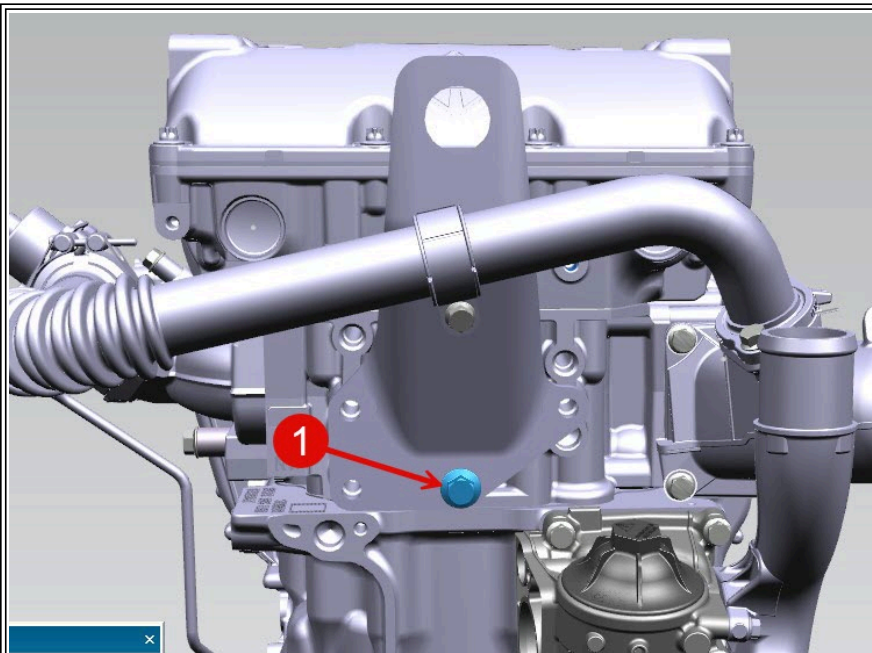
Bottom lifting eye mounting bolt behind fan drive bracket
